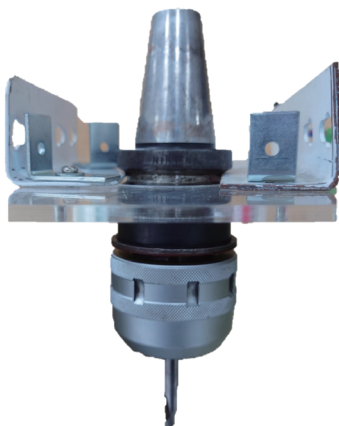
(Color online) Intelligent sensing milling tool and securely clamped tool.
